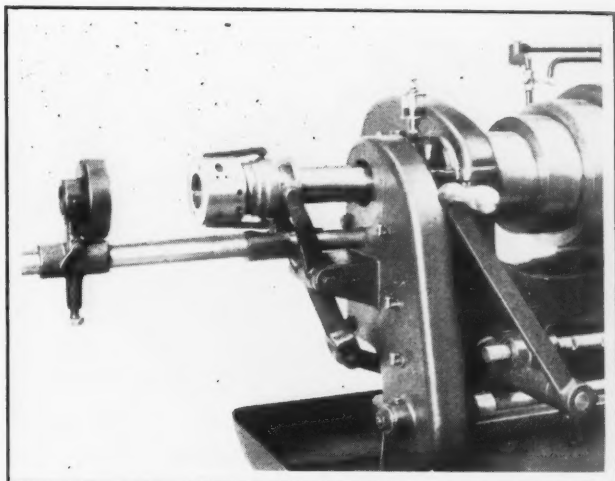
Automatic Chuck and Bar Feed Mechanism
